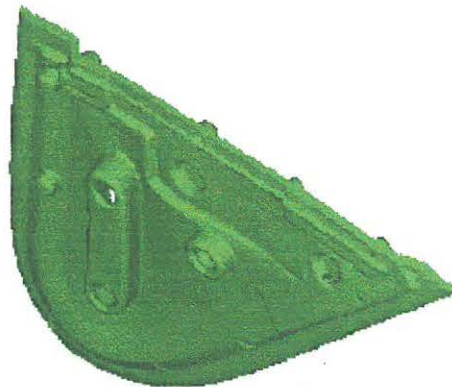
Motorcar door window rubber seal, frontal-top view.
